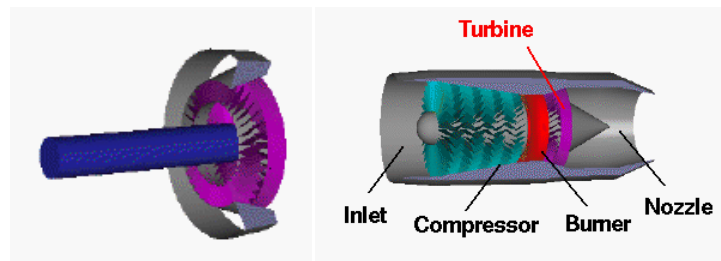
Power turbine and its position in gas turbine assembly [5]
